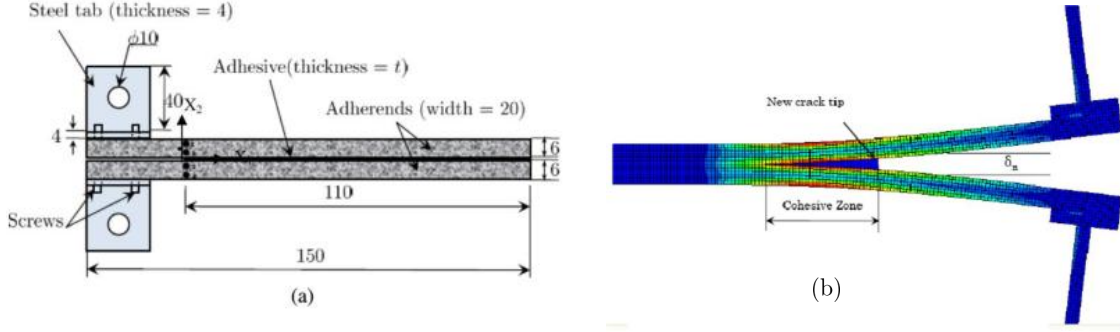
(a) Schematic of DCB Specimen (b) FE Deformed configuration of DCB Specimen [[27]]
